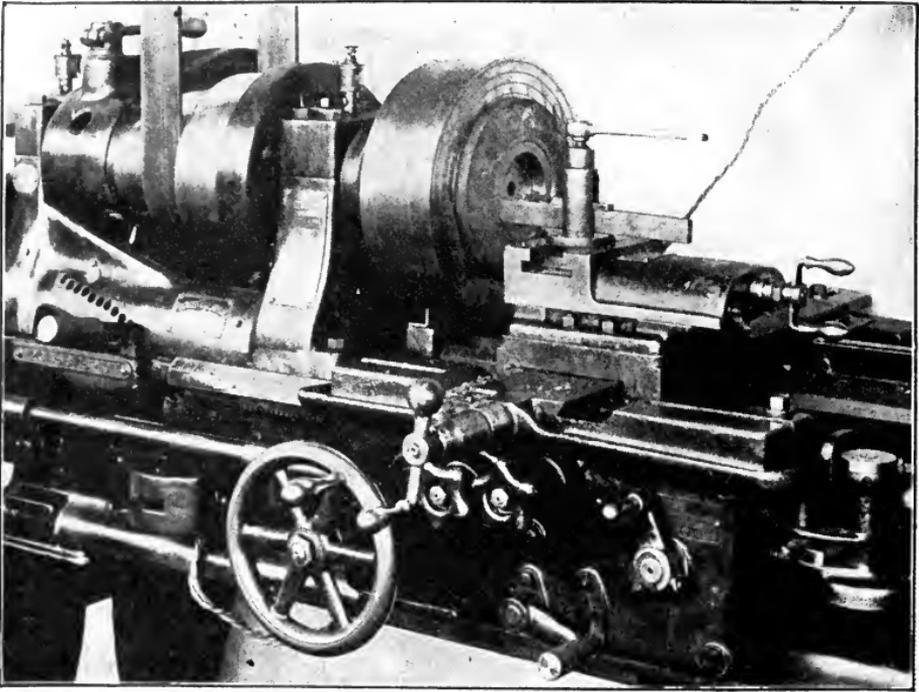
Close View of Heald Chuck Holding Disc for Turning Operation
